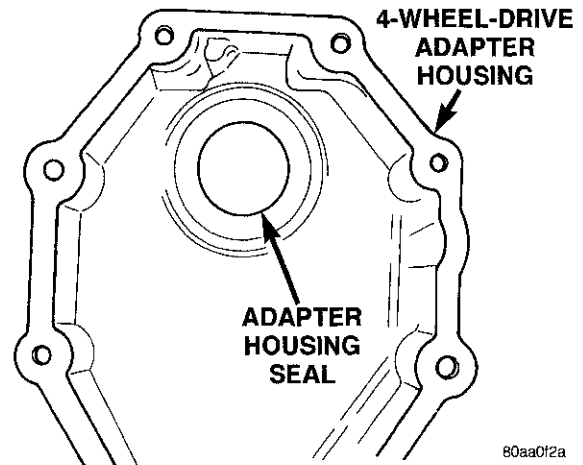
Adapter Housing (4-Wheel Drive Models)
